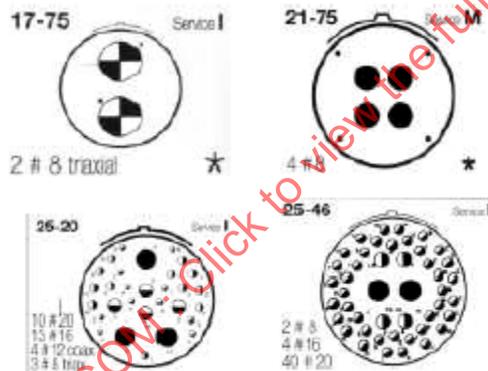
Example of MIL-DTL-38999 Connector Inserts that Support Quadrax Inserts
